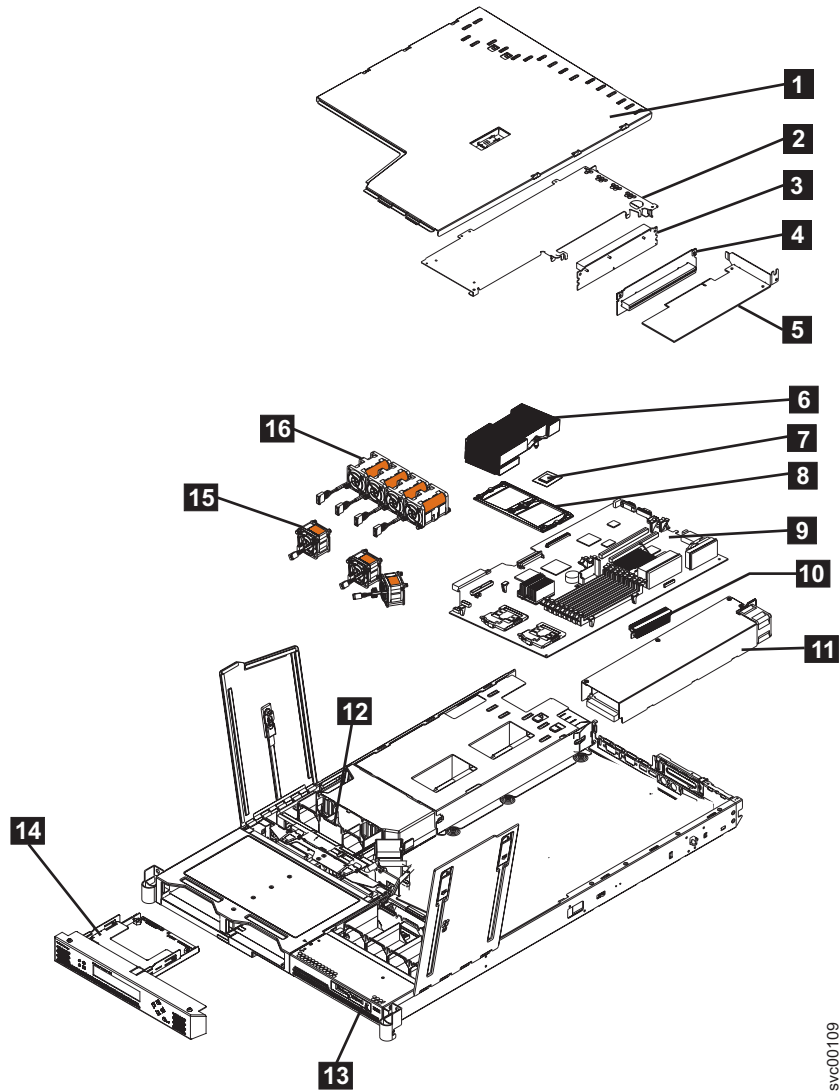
Exploded view of the SAN Volume Controller 2145-8F2 node
